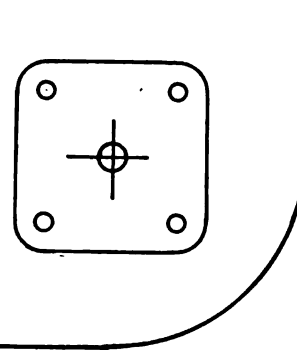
Plates are Sometimes Rivited to Both Sides of the Board to Form a Bearing for Centerboard Pin
